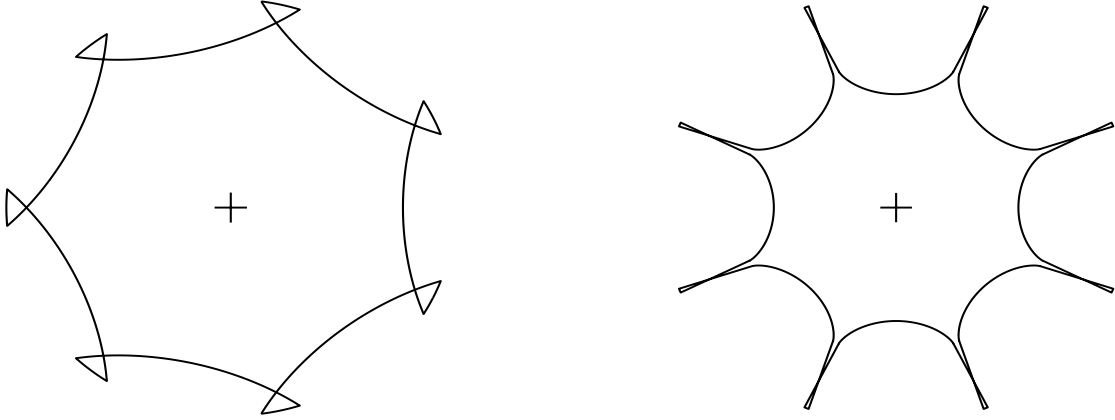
Outer gear tooth intersection in tooth form (left) and extension (right) for a generalized cycloidal outer gear [31]
